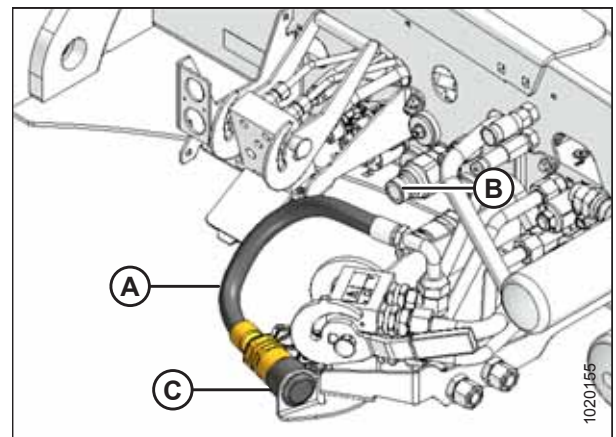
Knife Drive Hose on Rotary Disc and Draper Ready Windrower
